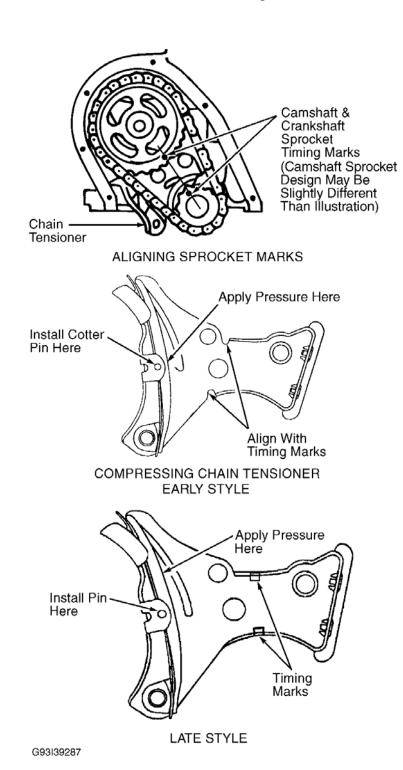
Aligning Timing Marks & Compressing Chain Tensioner
